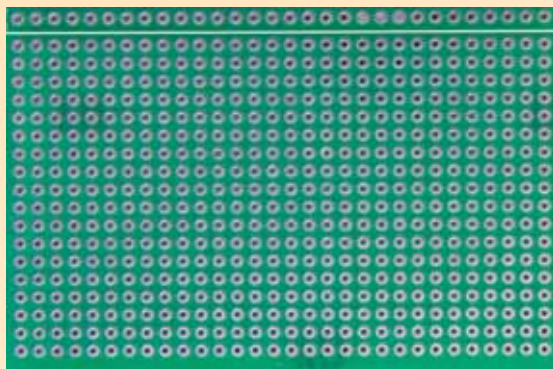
Boards for use with wire wrapping systems usually have pads, but no tracks. Pins are soldered to the pads in order to fix them to the board, and insulated wires are then used to carry the interconnections
